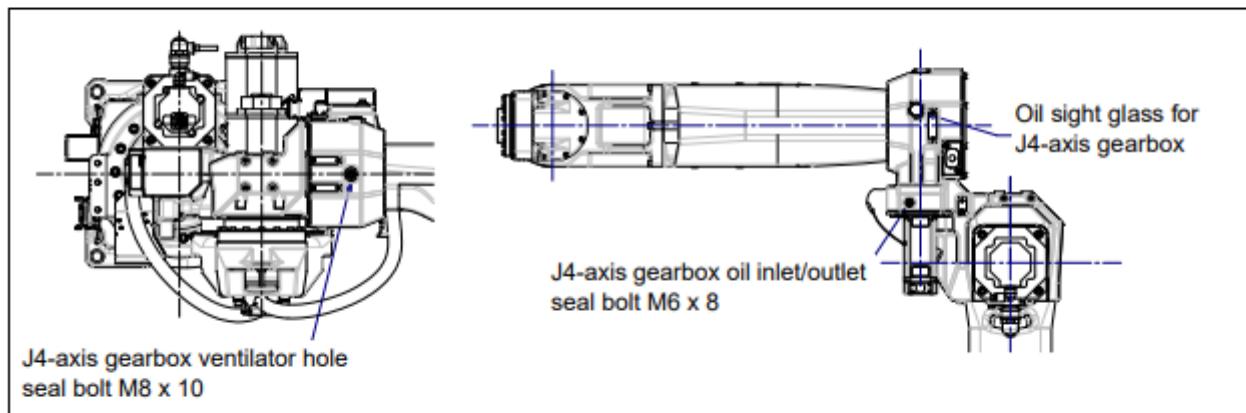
(a) Oiling point of J4-axis gearbox
